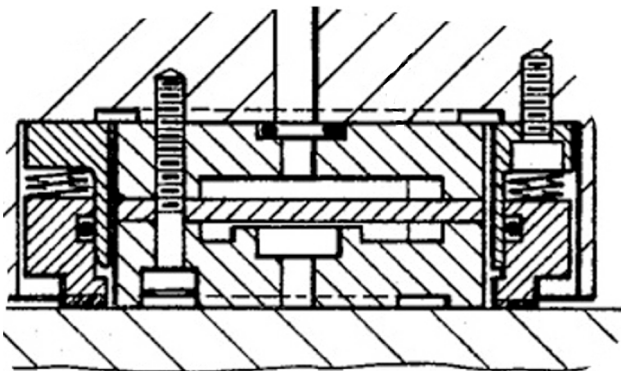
A hydrostatic bearing pad with active compensation and a face type seal.
